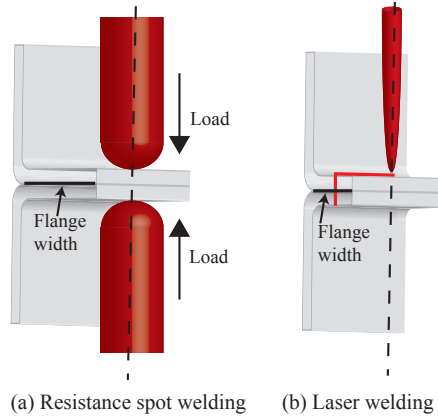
A schematic showing flange width required in the case of: (a) Resistance spot welding and (b) Laser welding.
